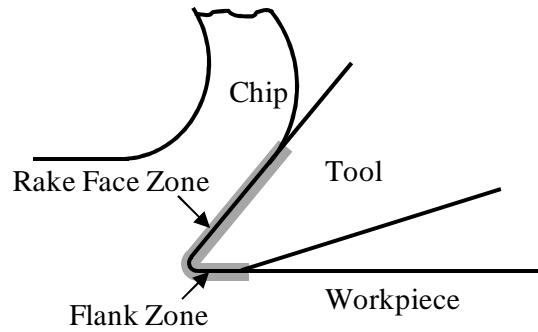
Two-dimensional representation of tool cutting the workpiece indicating contact zones.
